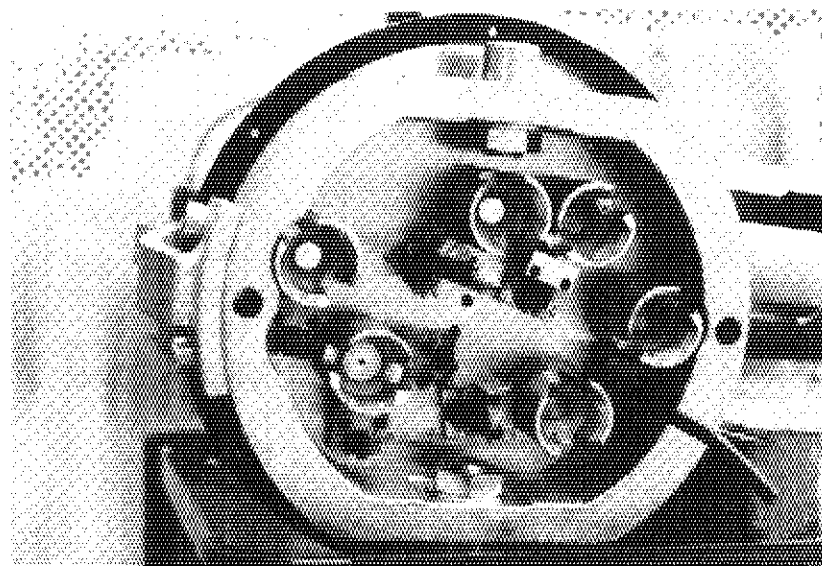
Joint and motion lock mechanism installed within slave arm shoulder end
